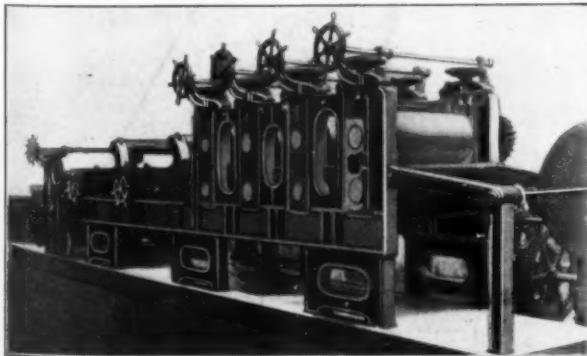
View from the Working Side of the Smith Fabric Treating Machine.
